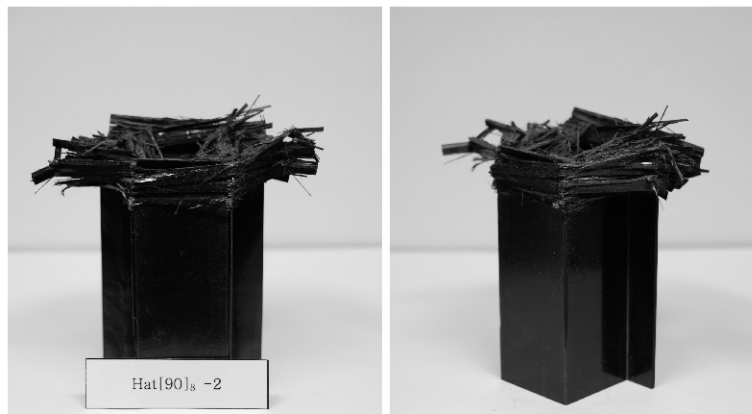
Shape of collapsed CFRP side member, $[90]_8$
